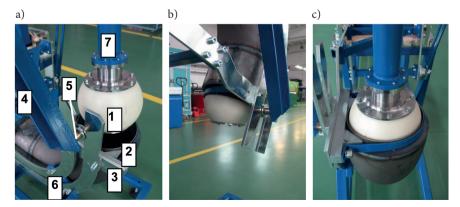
Model forming system: a) core guiding system, 1 – moulding core 2 – pipeline elements (elbow), 3 – connector, 4 – guiding roll arm, 5 – guiding roll, 6 – contour master, 7 – moulding core support, b) moulding core in its initial position, c) moulding core in its final position
